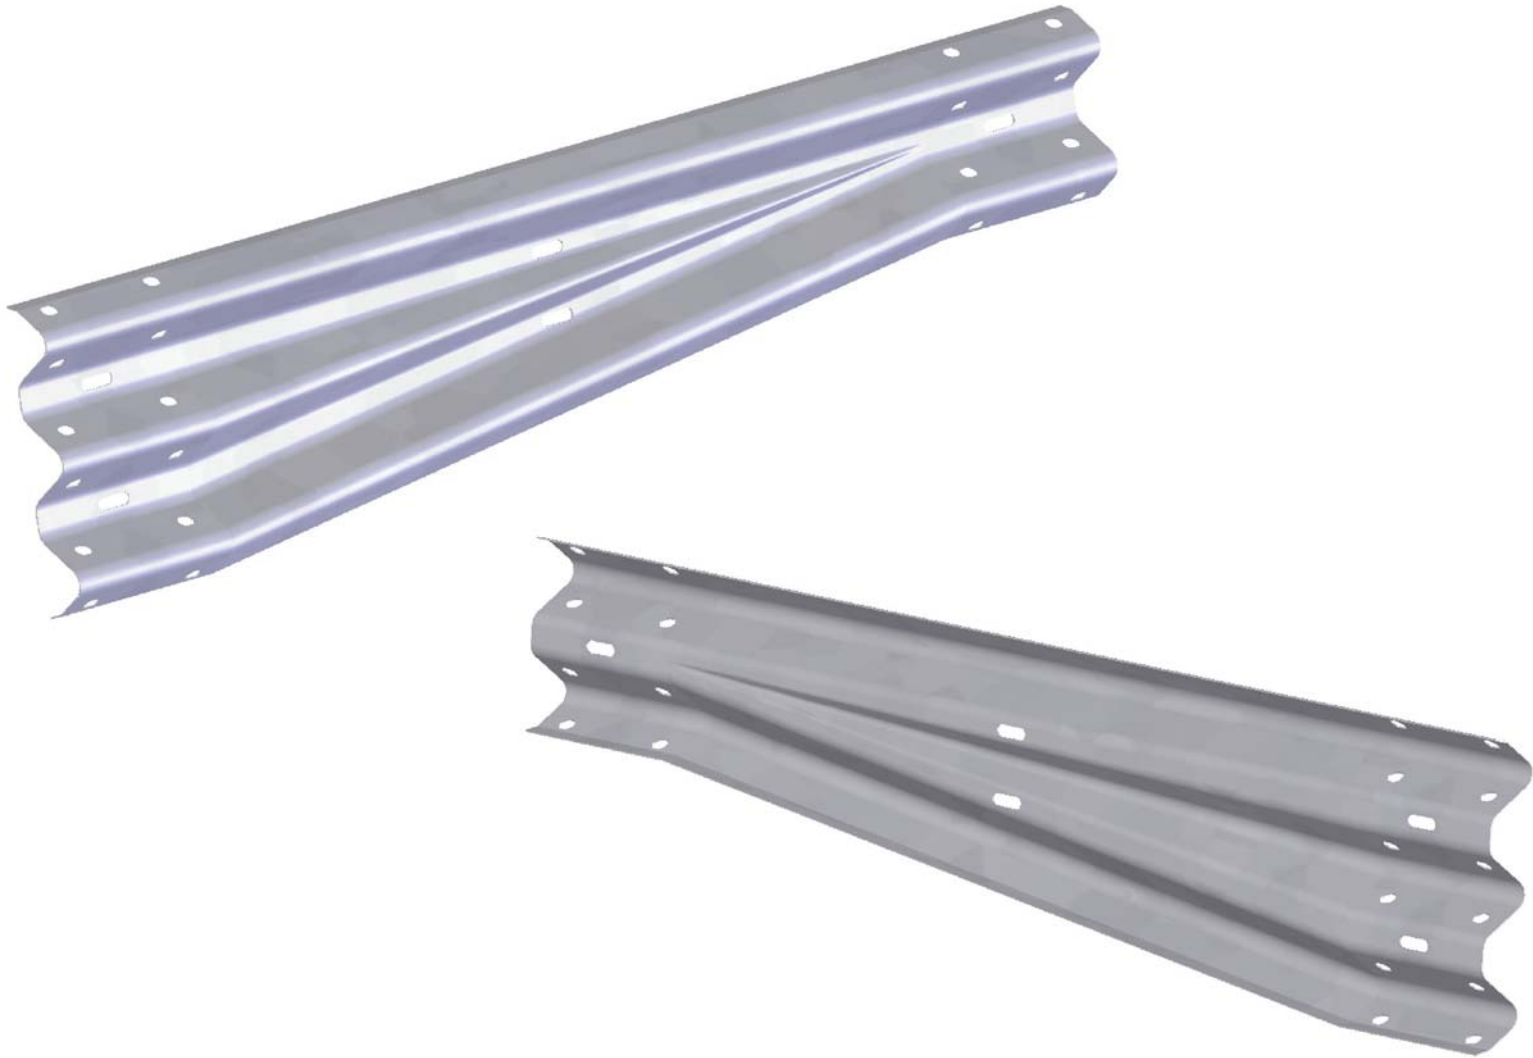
Asymmetrical W-Beam to Thrie Beam Transition Element Prototype, Design No. 3
